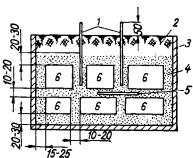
Arrangement of parts in containers: 1 - outside "witnesses": 2 - luting; 3 - container; 4 - carburiser; 5 - internal "wifness"; 6 - parts
